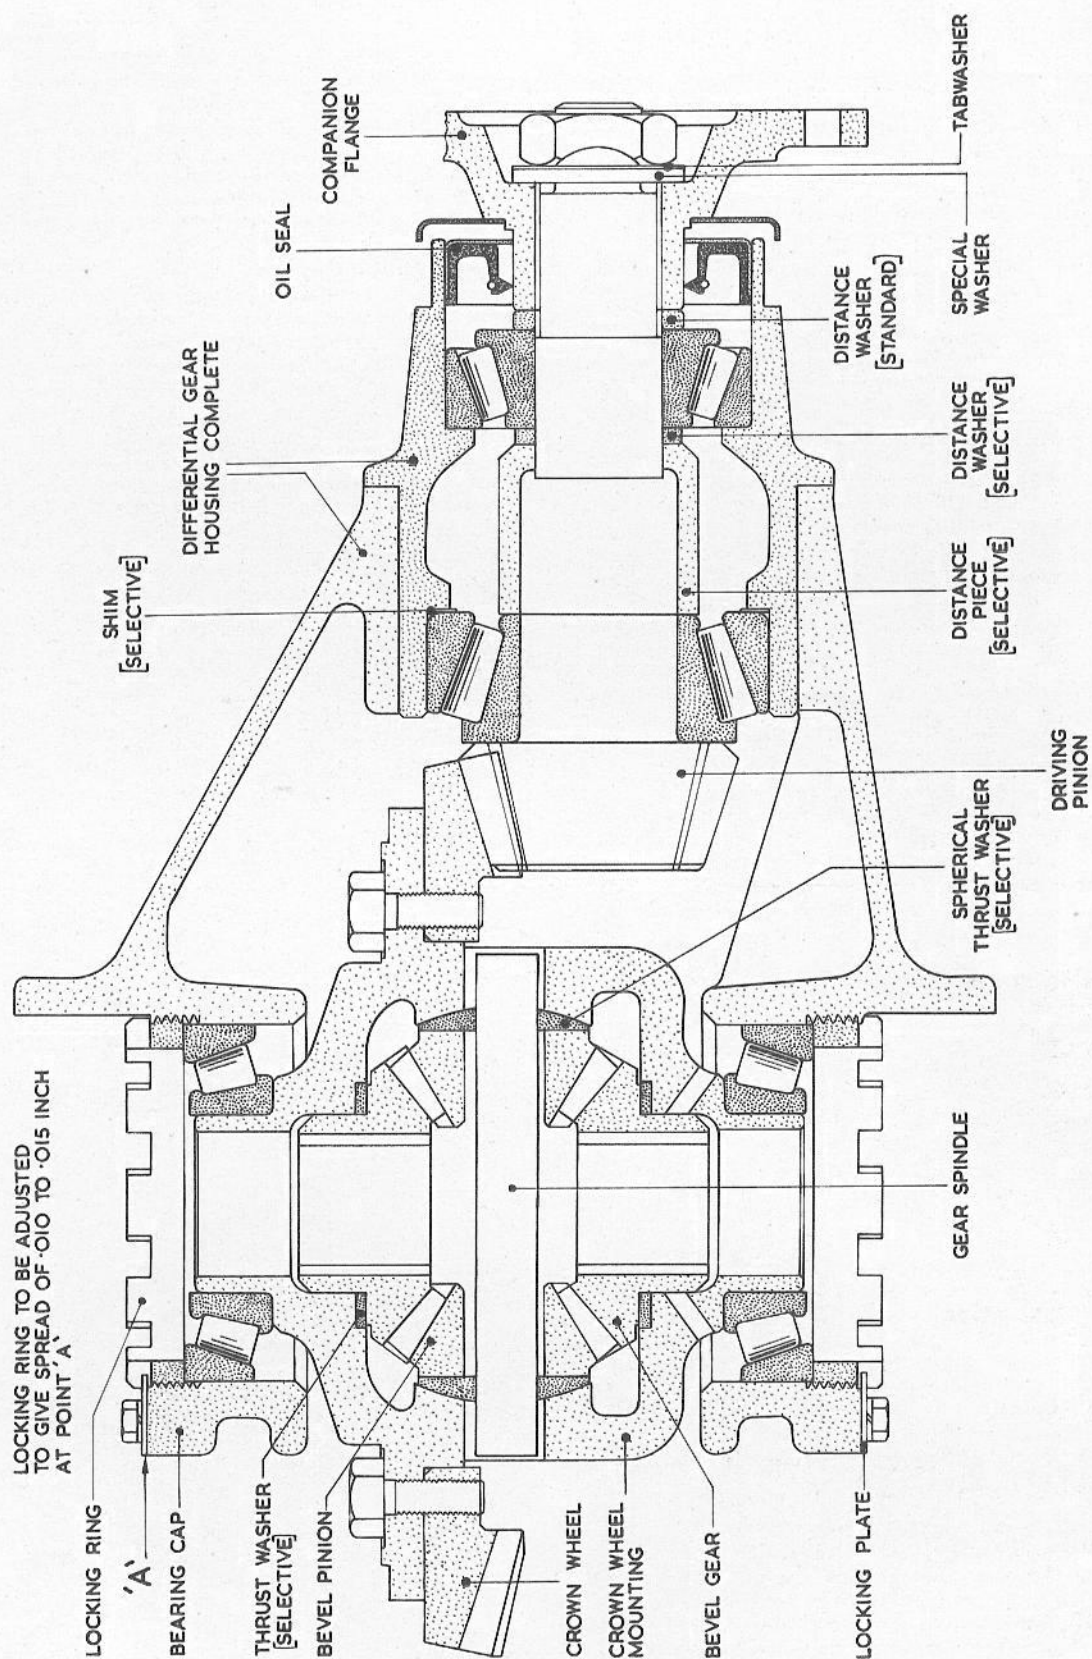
Assembly of differential unit (Fixed bearing housing)
